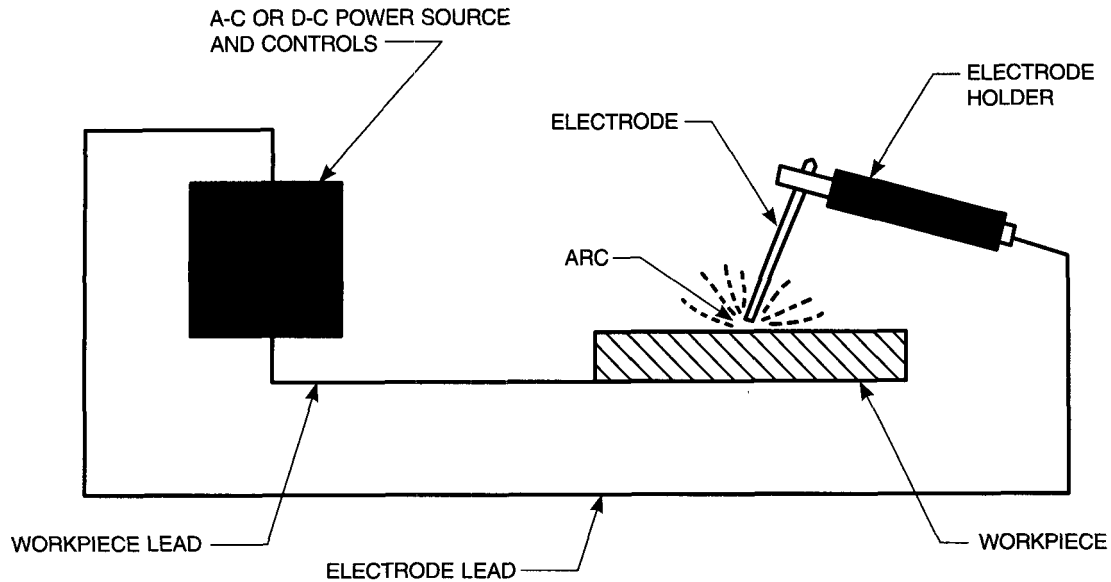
Typical Welding Circuit for Shielded Metal Arc Welding
